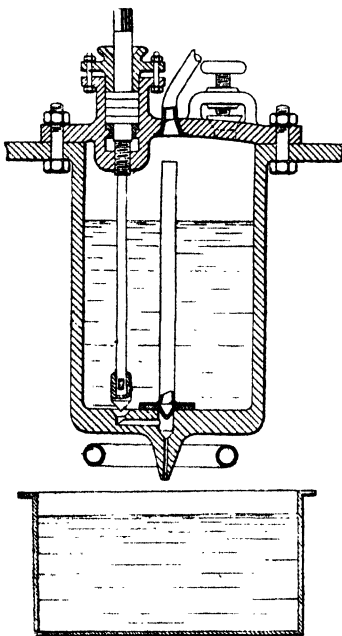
Apparatus in which Molten Metal is Fed to the Spraying Nozzle by Gas Pressure.
